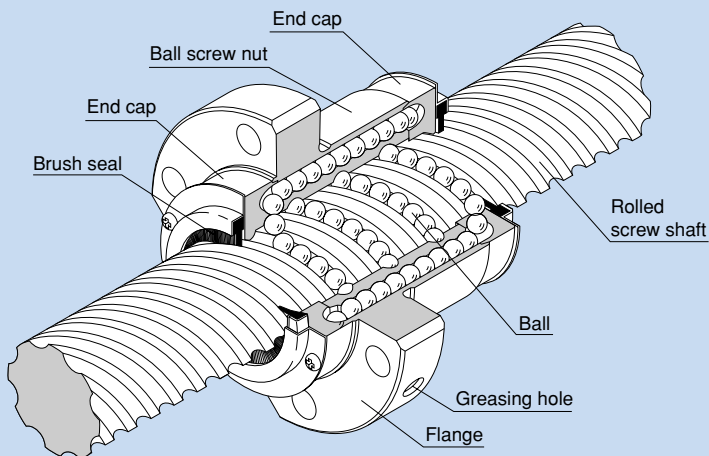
Structure of the Large-Lead Nut Rolled Ball Screw
